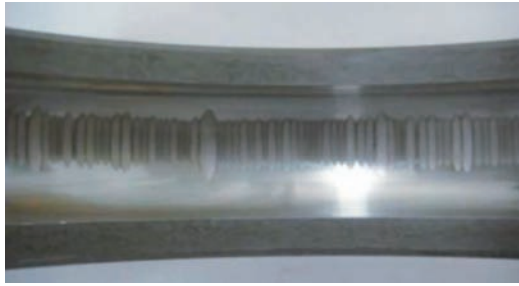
Outer raceway failure of electrical pitting⁵⁾
